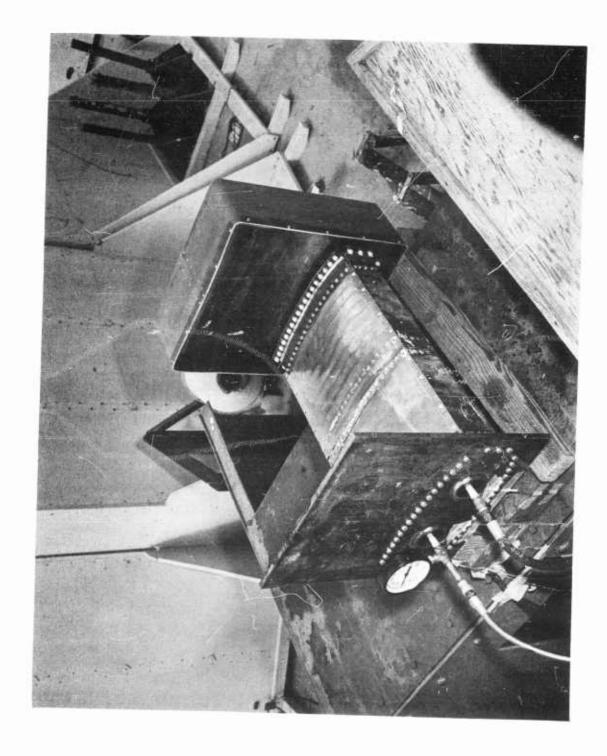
Test Setup -- Two Segment Duct Assembly
